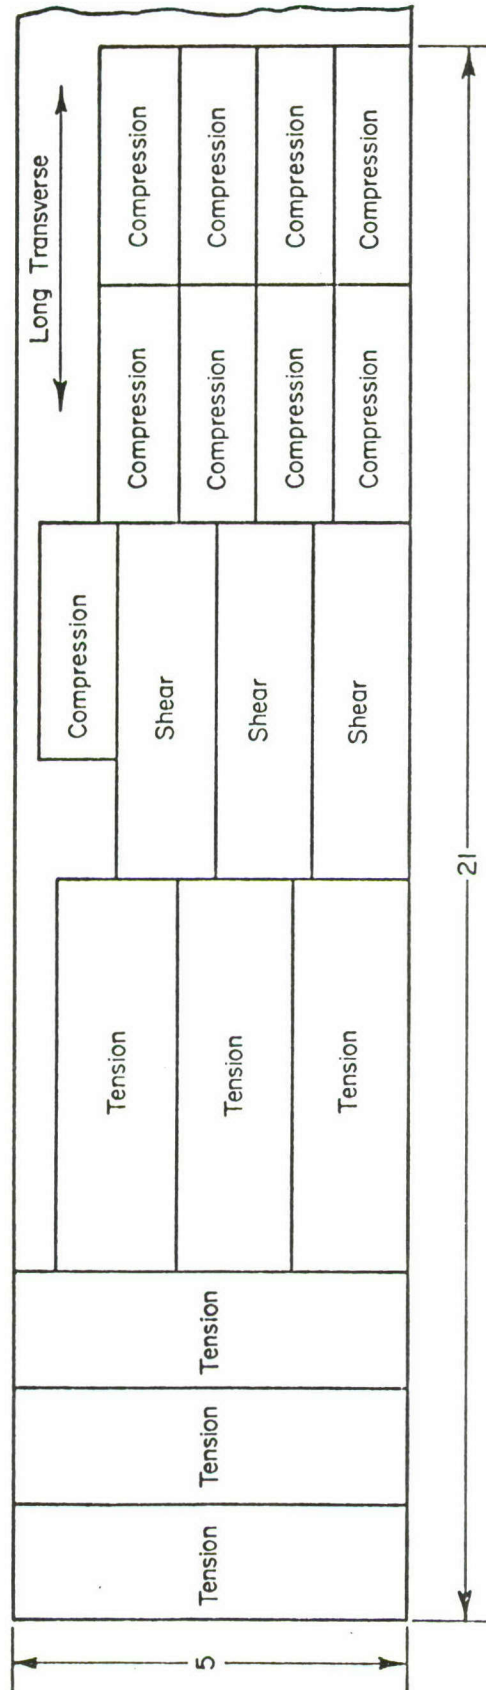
LOCATION OF TEST SPECIMENS FOR ALLOY 188 SHEET -- CODES D, E, AND F
